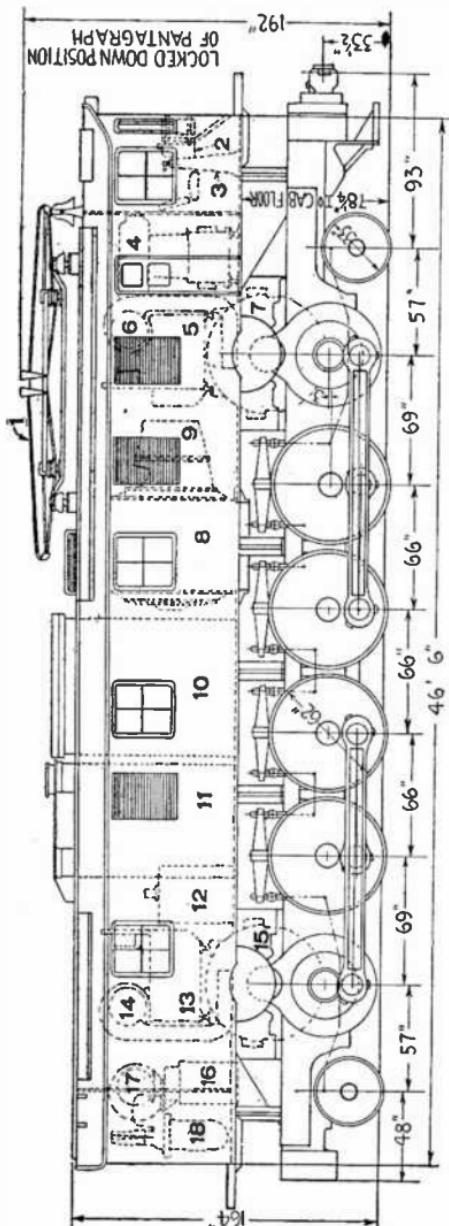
General arrangement of apparatus and principal dimensions of the Virginian locomotives. They are of the split phase, constant speed type with one three phase induction motor driving, through a jack shaft and side rods, two of the driving axles in each truck. Single phase, 25 cycle power at a pressure of either 11,000 or 22,000 volts is supplied to the transformer on the locomotive through a pantagraph collector. Low voltage power for the three phase traction motors and for the auxiliaries is taken from the transformer and phase converter. The traction motors are of the induction type arranged for two comparatively constant running speeds of 14 and 28 m.p.h. The parts are: 1, pantograph; 2, master controller; 3, air brake valve pedestal; 4, air compressor; 5, control apparatus on traction motor; 6, traction motor blowers; 7, traction motor; 8, phase converter; 9, phase converter starting motor; 10, liquid rheostat; 11, main transformer; 12, preventive coil; 13, control apparatus on traction motor; 14, traction motor blower; 15, traction motor; 16, traction motor blower; 17, radiator oil cooling radiator; 18, oil circuit breaker.
